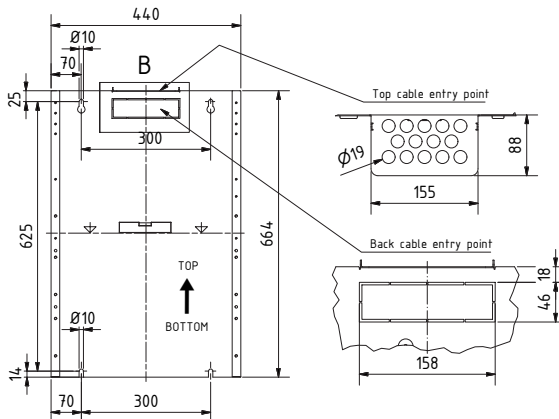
LPS mounting plate from the front (dimensions without cover)
